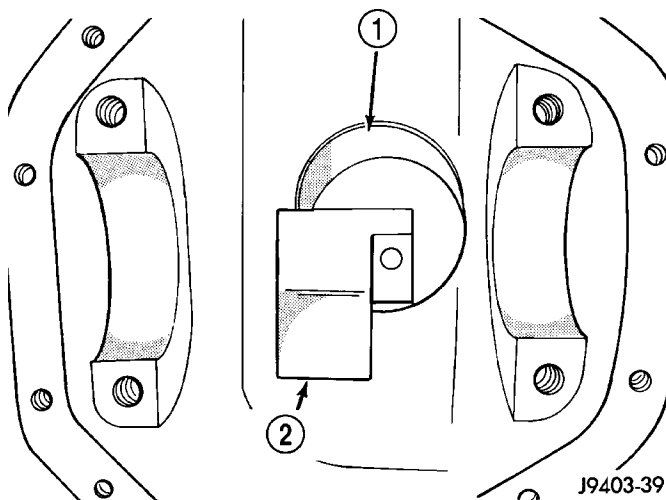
PINION GEAR DEPTH GAUGE TOOLS
